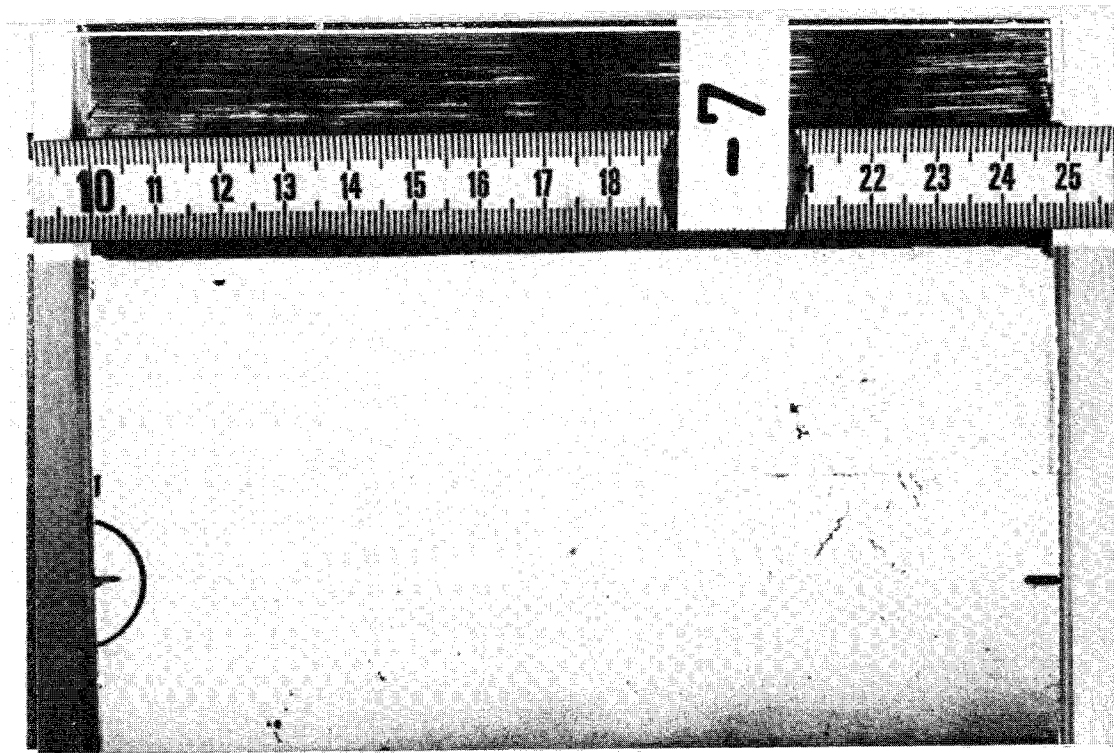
Specimen No. 7 : crack offset : - 16 mm
